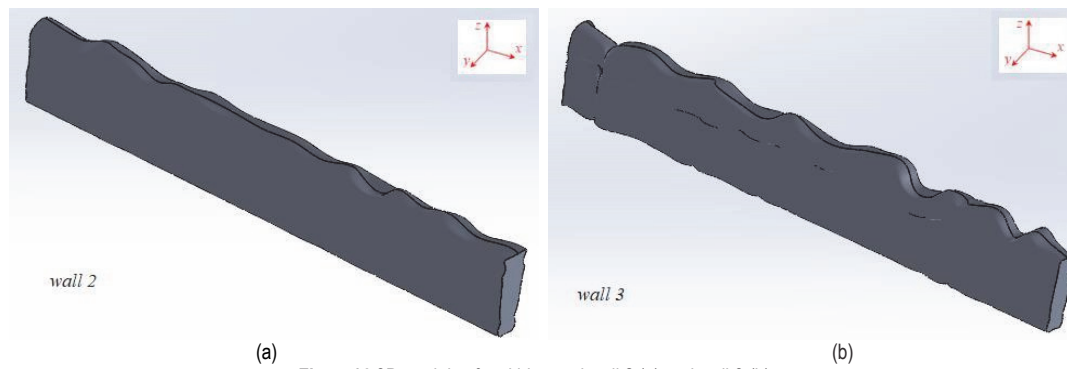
3D models of multi-layered wall 2 (a) and wall 3 (b)
